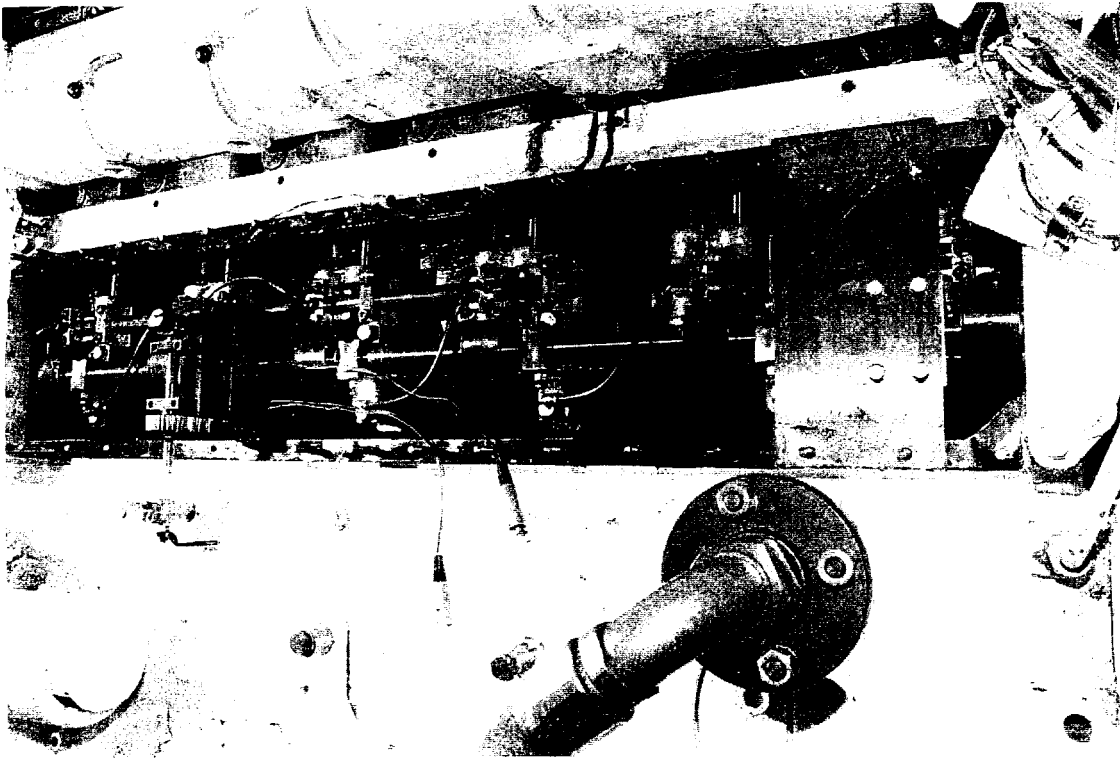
GENERAL VIEW OF THE INSTALLED VVT MECHANISM
